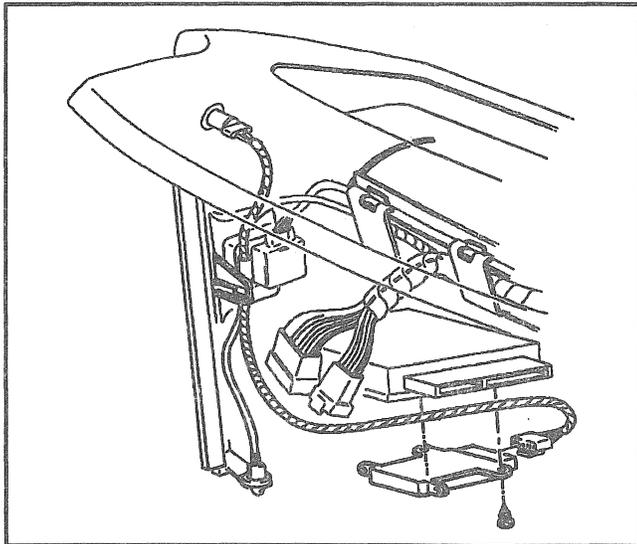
Vehicle Speed Sensor Calibrator Module Replacement
